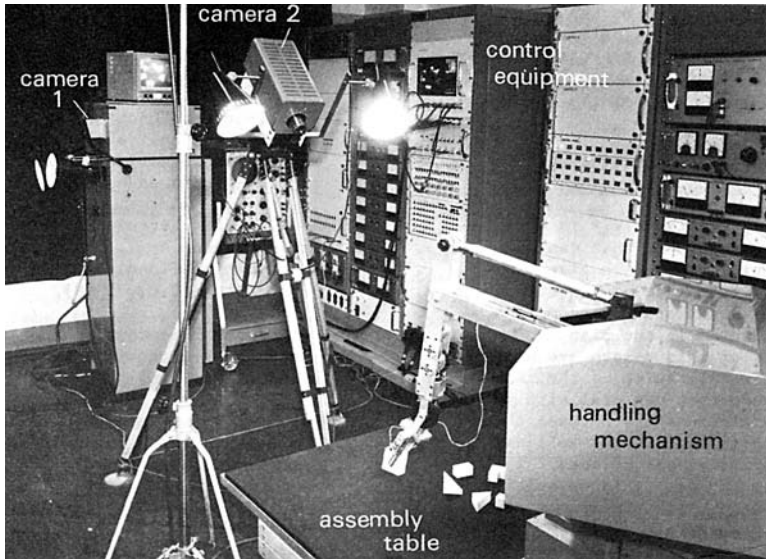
Hitachi's HIVIP robotic assembly system.
